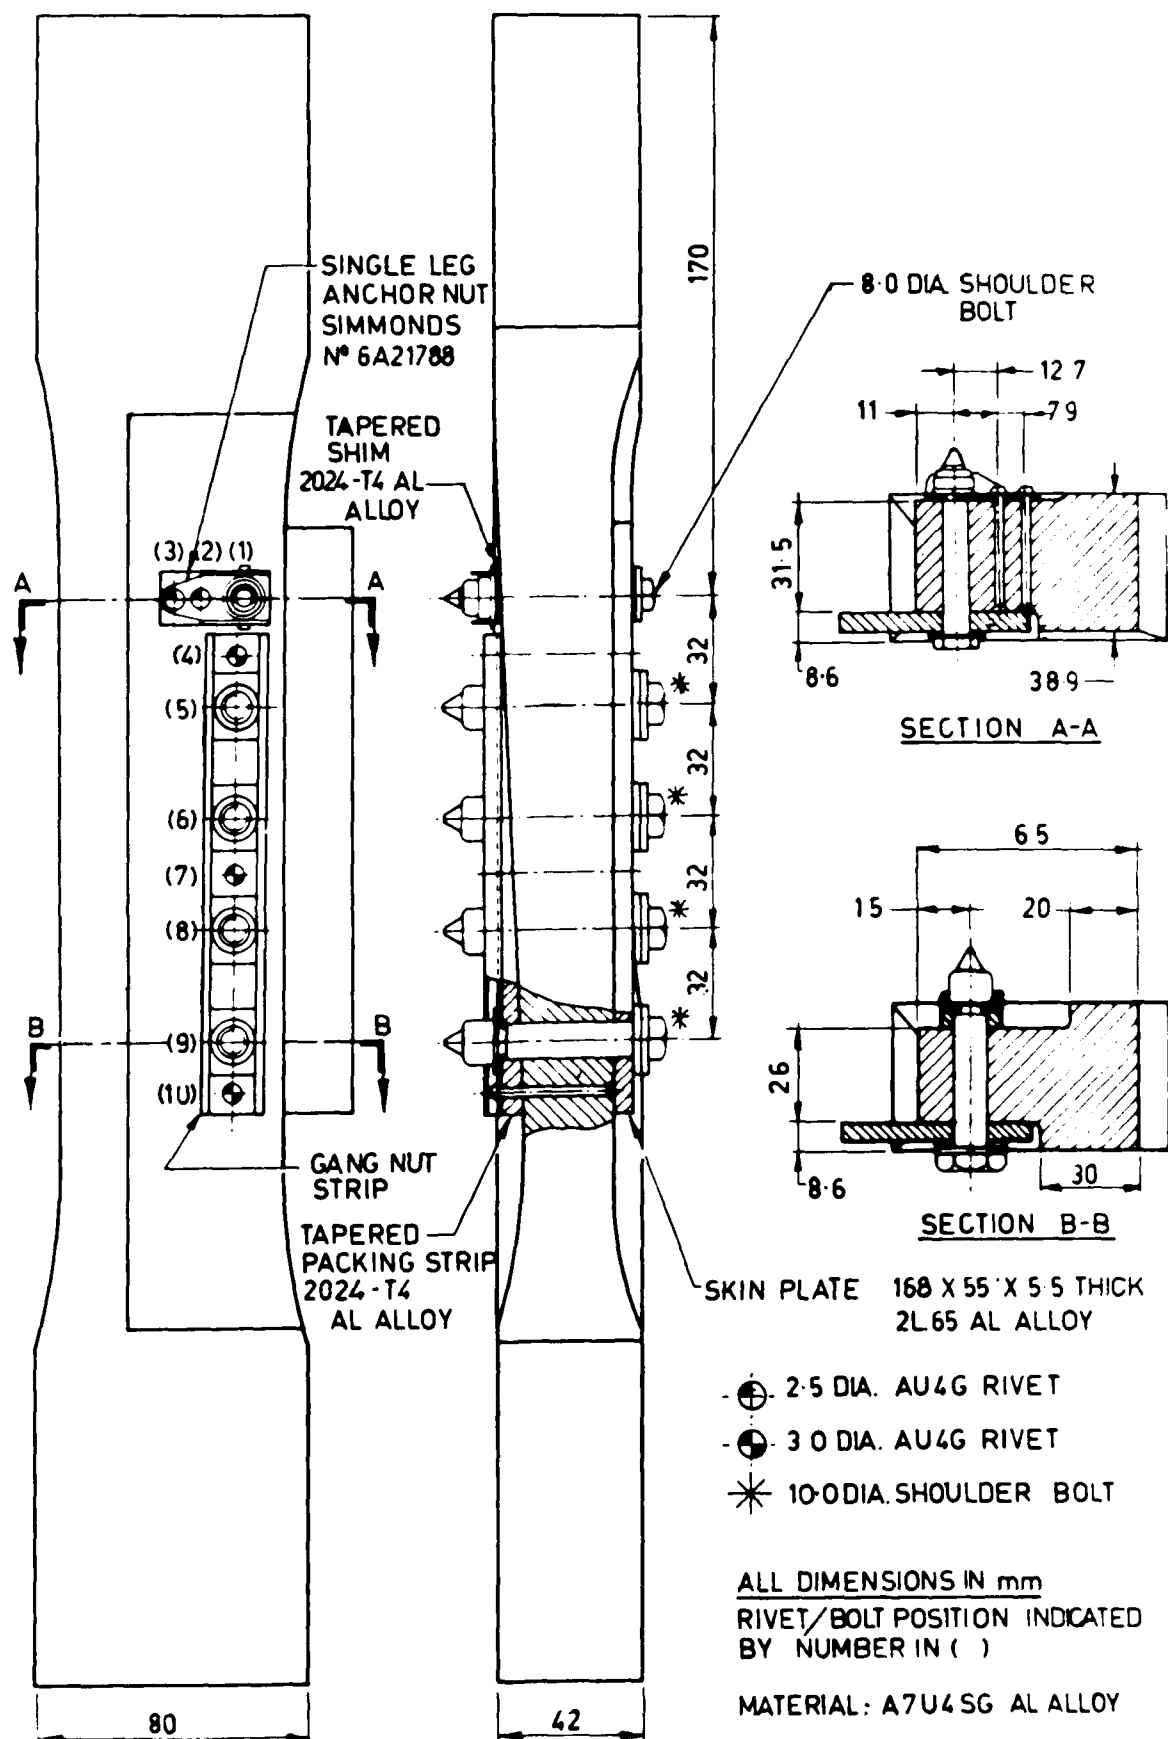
MIRAGE SPAR LOWER REAR FLANGE FATIGUE SPECIMEN
